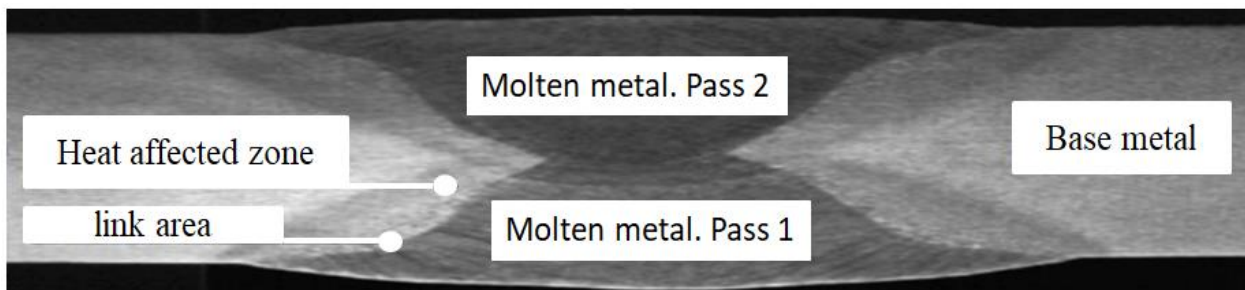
15 Microscopic illustration of existing areas on a specimen containing the weld bead.
